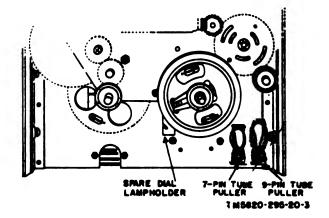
Gear plate, front panel removed, showing location of special tools supplied with receiver.
